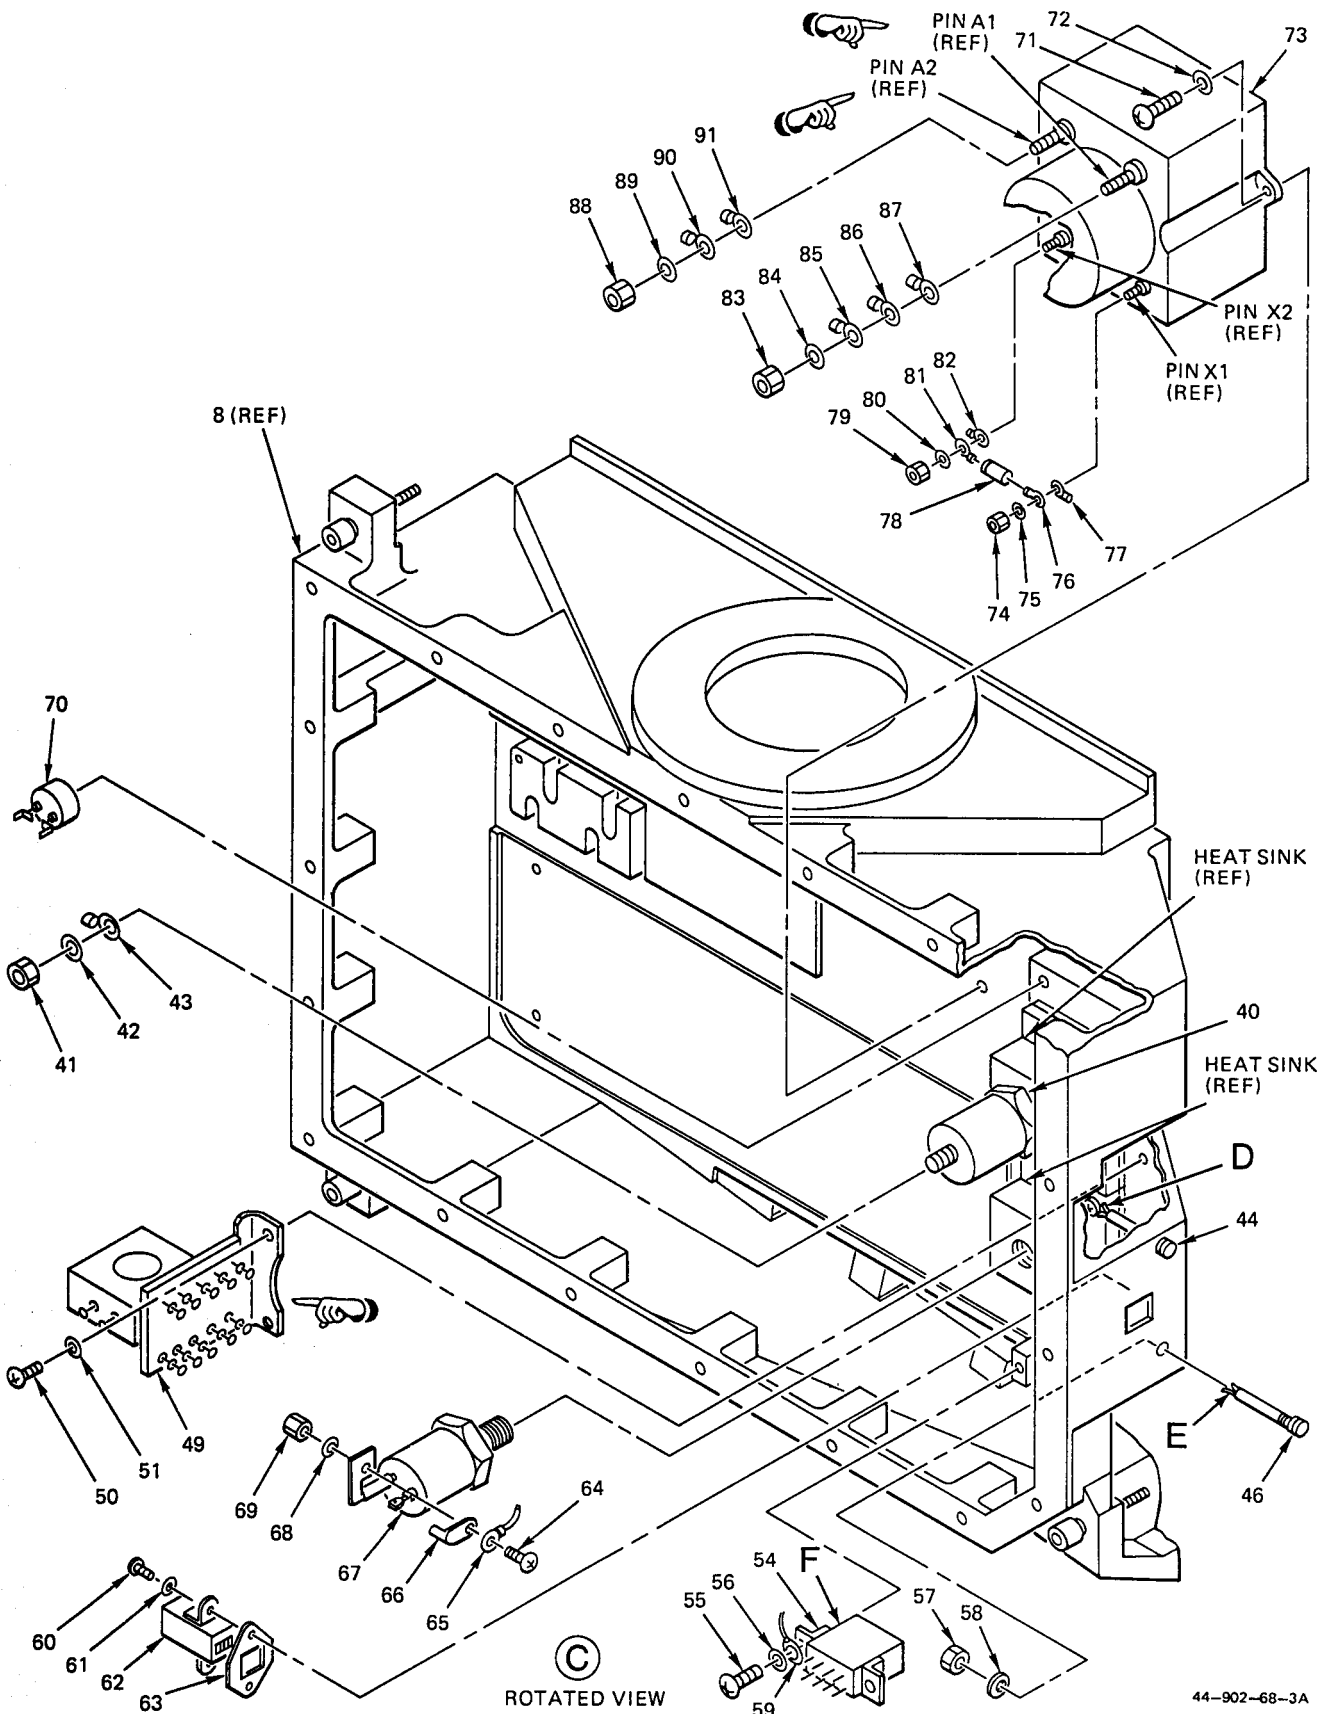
Power Supply Subassembly Exploded View (Sheet 3 of 6)
